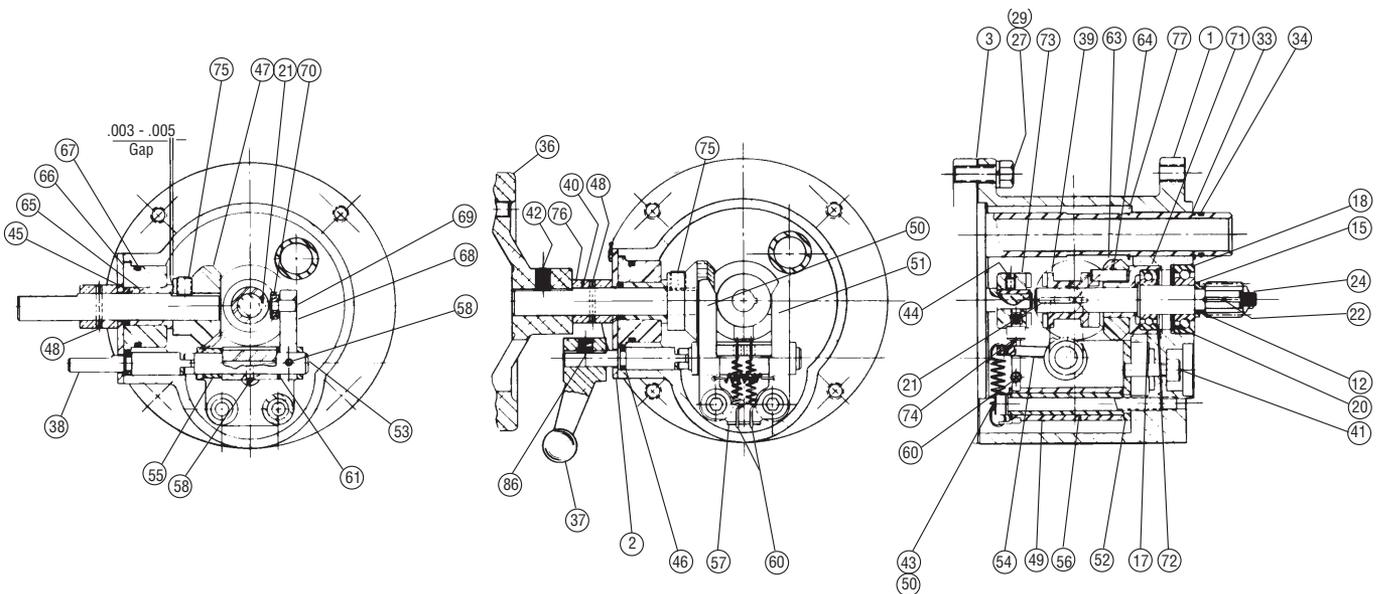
Manual Handwheel Clutch Assembly Parts Drawing
